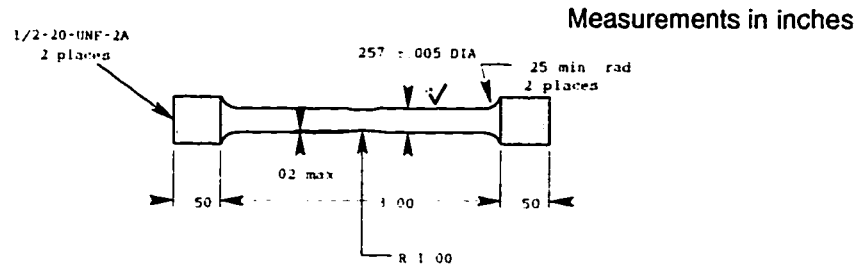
Smooth weld metal tensile specimen. (Figures appear larger in Appendix A for clarity.)
